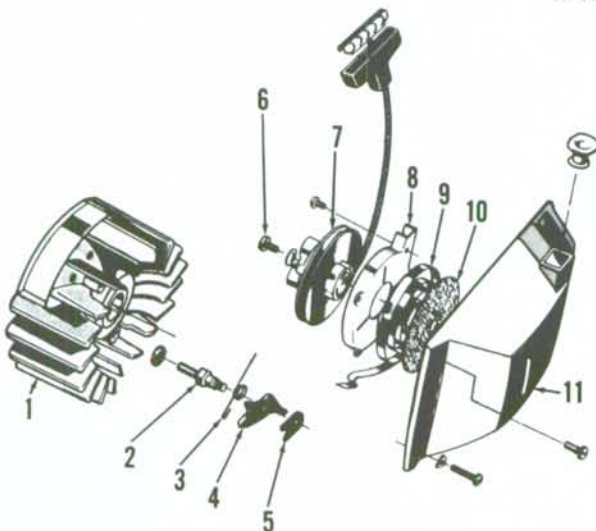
Exploded view of Models 40 Rancher and 44 rewind starter. Other models are similar.
